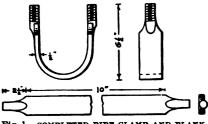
COMPLETED PIPE CLAMP AND BLANK BEFORE BENDING.
